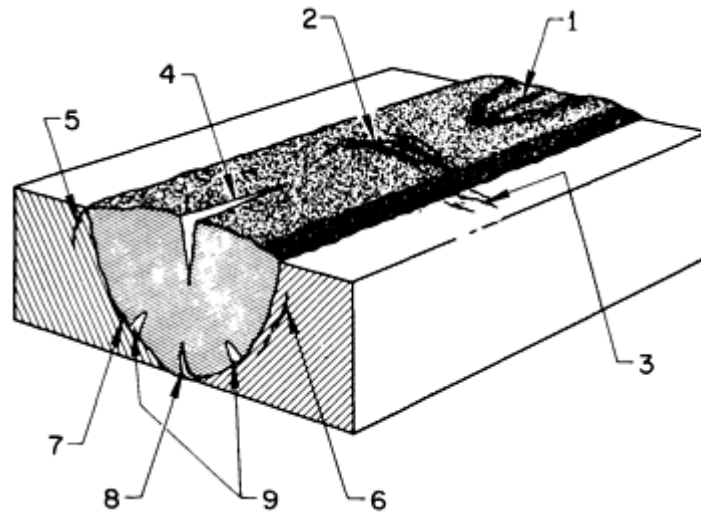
IDENTIFICATION OF CRACKS ACCORDING TO LOCATION IN WELD AND BASE METAL. 1, CRATER CRACK IN WELD METAL; 2, TRANSVERSE CRACK IN WELD METAL; 3, TRANSVERSE CRACK IN HAZ; 4, LONGITUDINAL CRACK IN WELD METAL; 5, TOE CRACK IN BASE METAL; 6, UNDERBEAD CRACK IN BASE METAL; 7, FUSION-LINE CRACK; 8, ROOT CRACK IN WELD METAL; 9, HAT CRACKS IN WELD METAL
